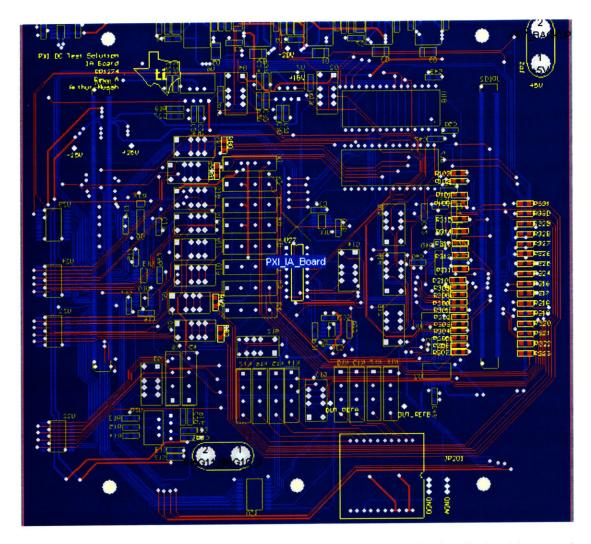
The PCB diagram for the INA Test Configuration Board, showing the signal layers and device footprints.
